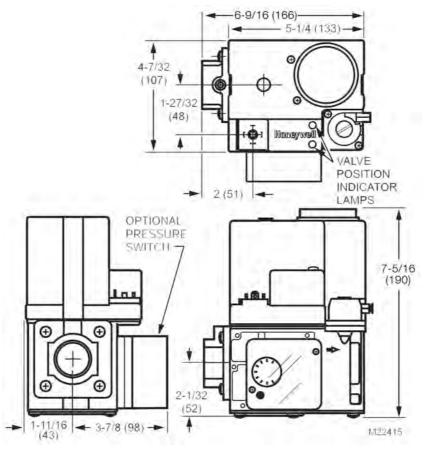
V4730C/V8730C Gas Valves, 1-1/4 in. (32mm) size, dimensions in in. (mm).
